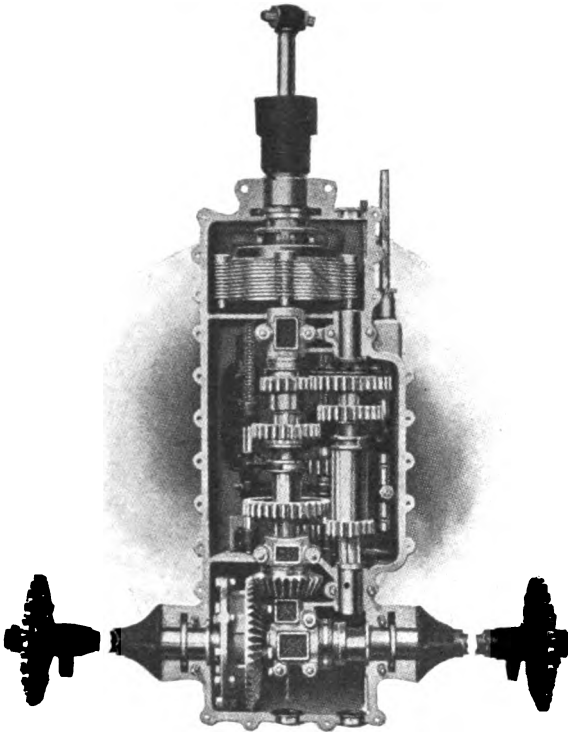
Clutch, Sliding Gear and Counter Shaft.
